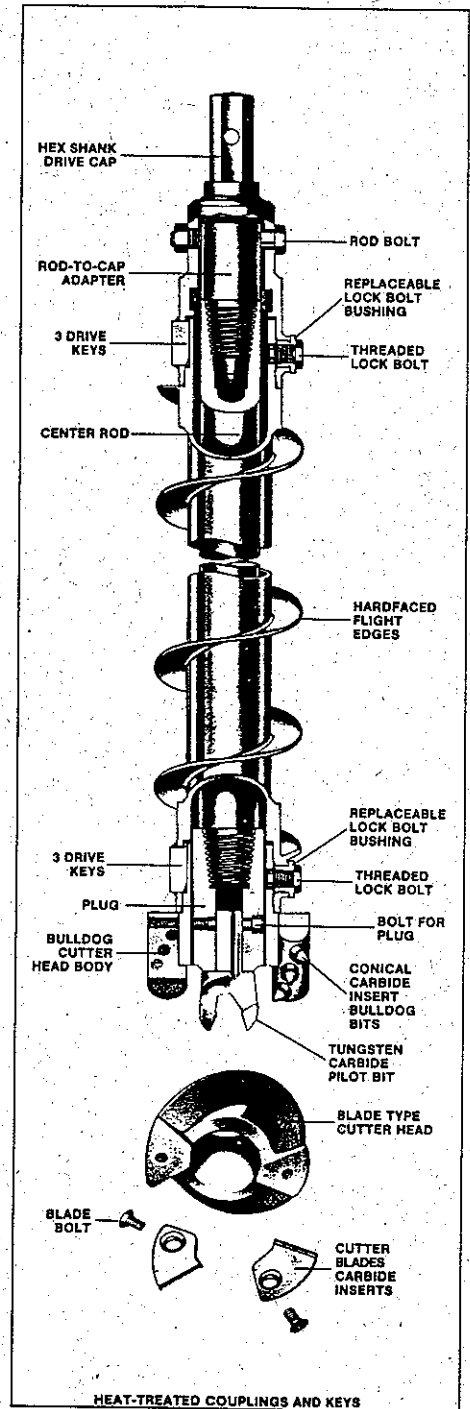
The lowest flight in a hollow-stem auger drill string is equipped with a cutter head and a pilot bit. (Mobile Drilling Company, Inc.)
